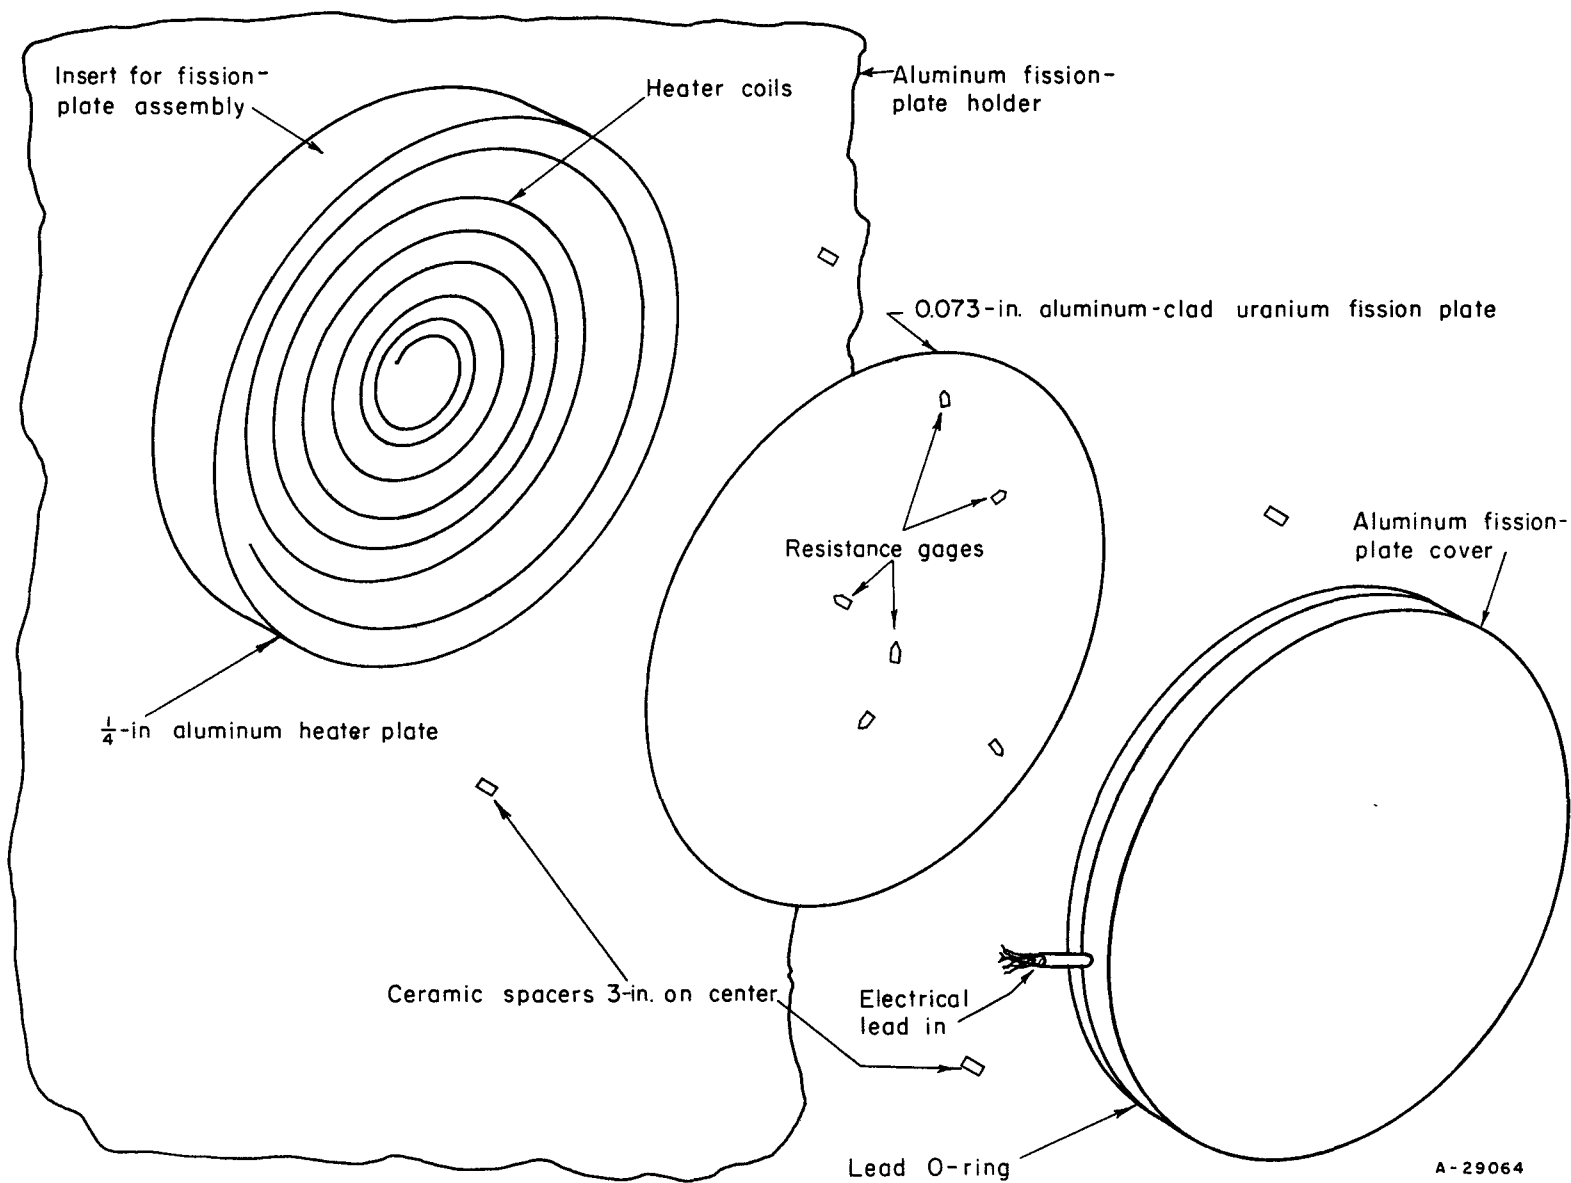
EXPLODED SKETCH OF FISSION-PLATE ASSEMBLY
